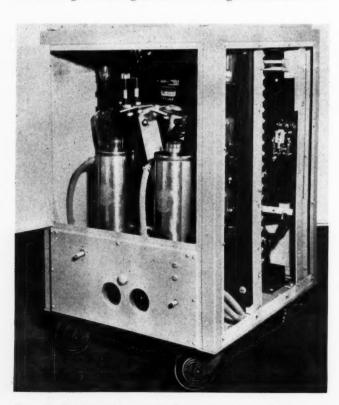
Spot-welding control unit employs floating-hub swivel casters to protect delicate equipment from shocks
